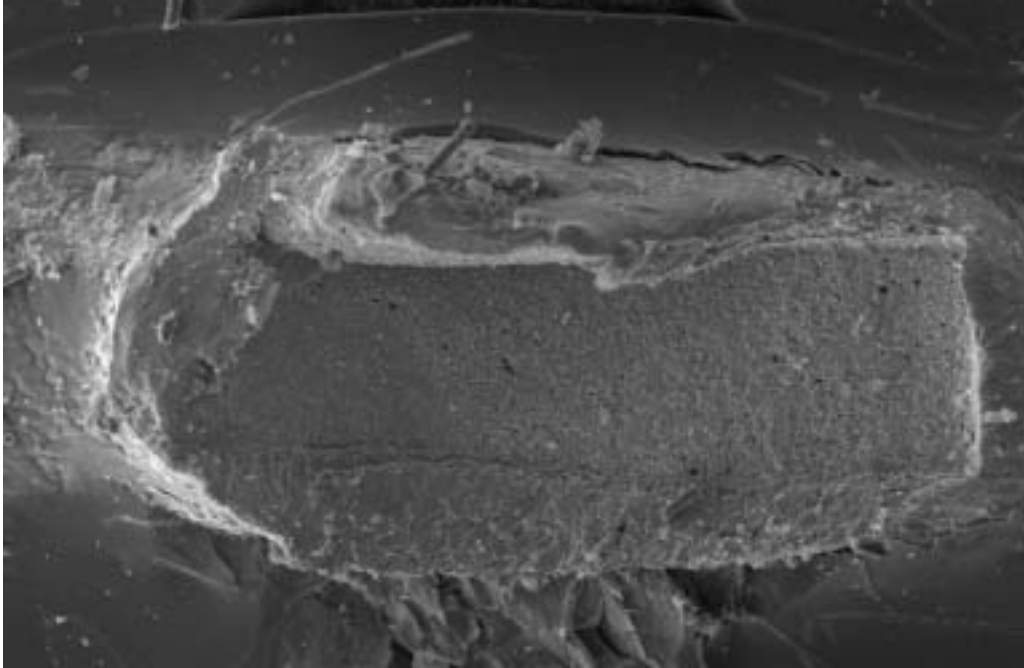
(Cont.) The Fracture Surfaces after Pull Test.
